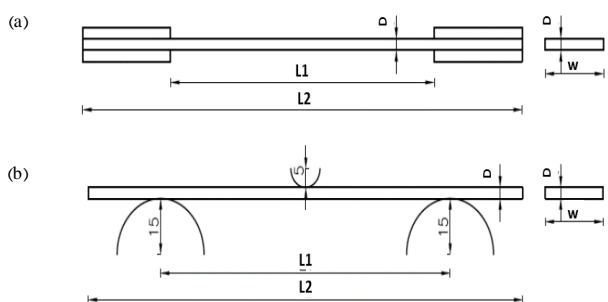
Geometrical parameters of the specimens for (a) tensile tests, (b) 3PB tests
